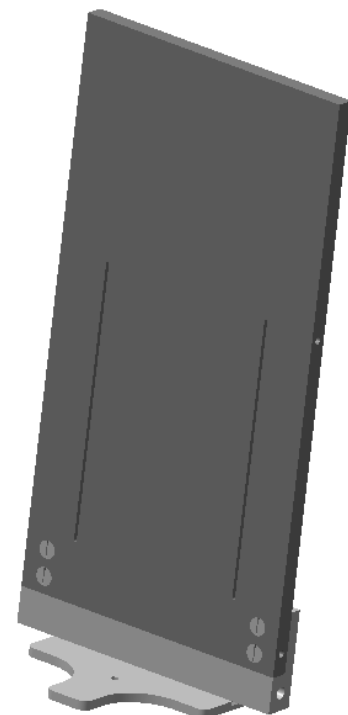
The assembly of the chair back, including the aluminum rotator piece, seat pan support, and the PVC back rest.
